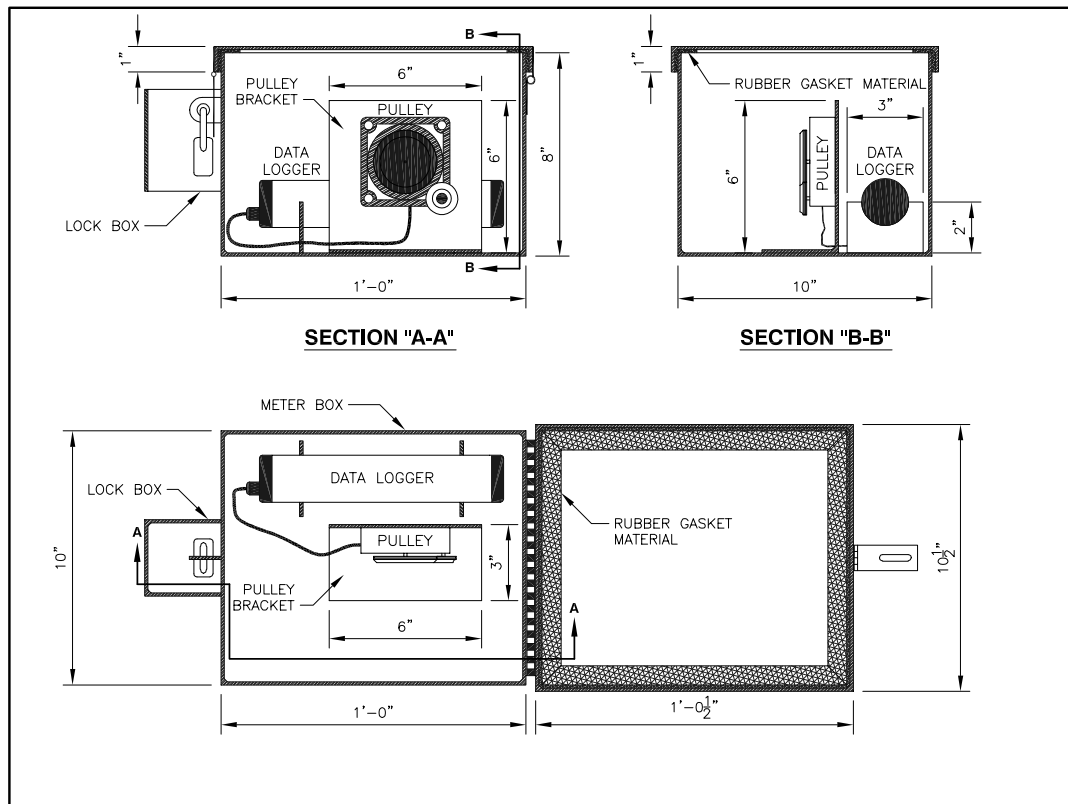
Construction drawing for the instrument housing unit used on the static marsh mat continuous recorder system.
